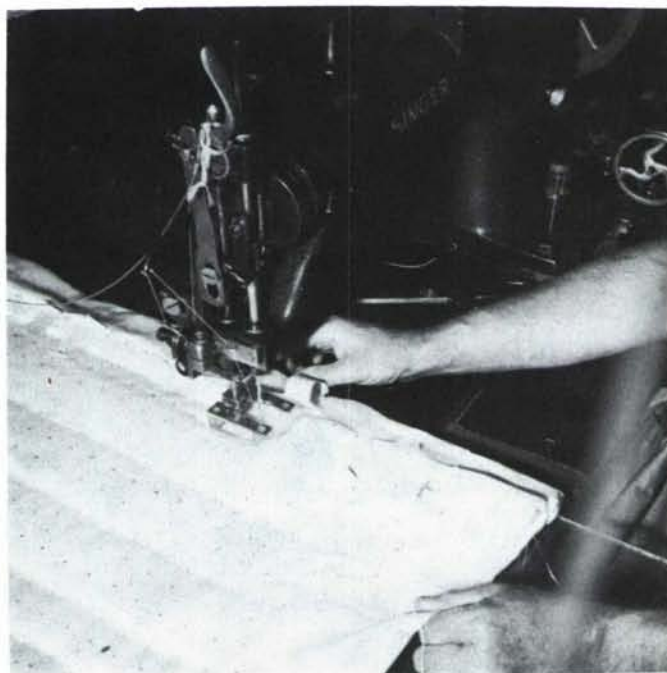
CLOSE-UP VIEW OF INSULATION BLANKET STITCHING
